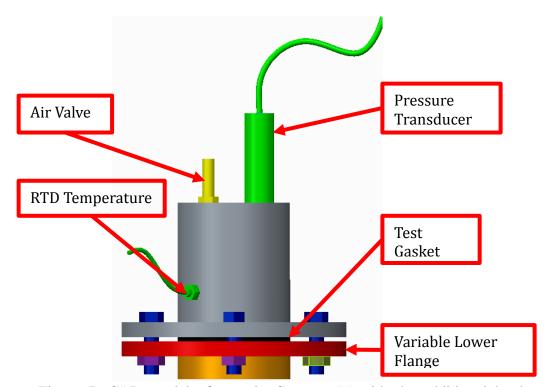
CAD model of test rig Concept #5 with the additional hardware components required for testing purposes
